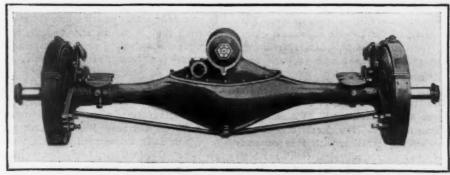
AMERICAN BALL BEARING LANCHESTER-TYPE WORM-DRIVE AXLE
